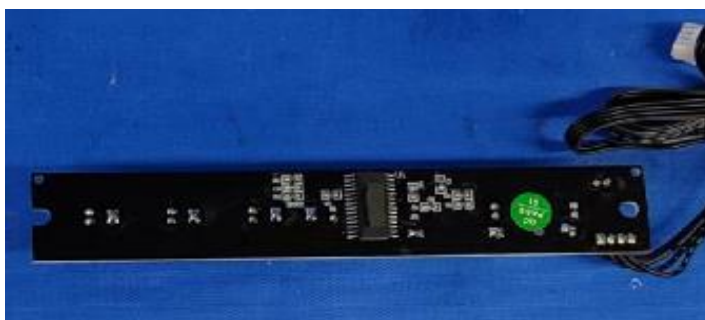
Control PCB-1 view of model S180, S230B, S230C, S280
